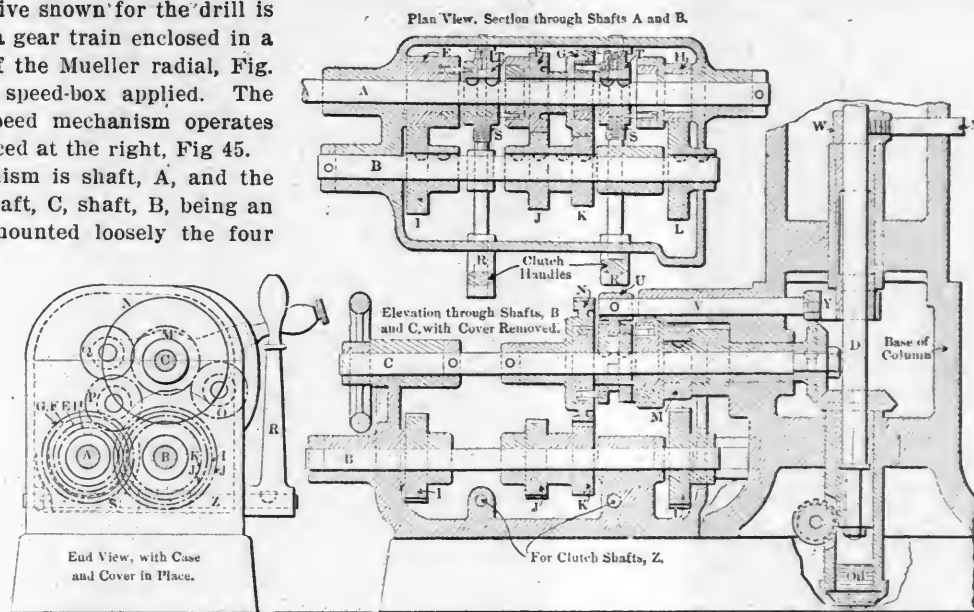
DETAILS OF THE VARIABLE-SPEED MECHANISM FOR THE MUELLER RADIAL DRILL.
